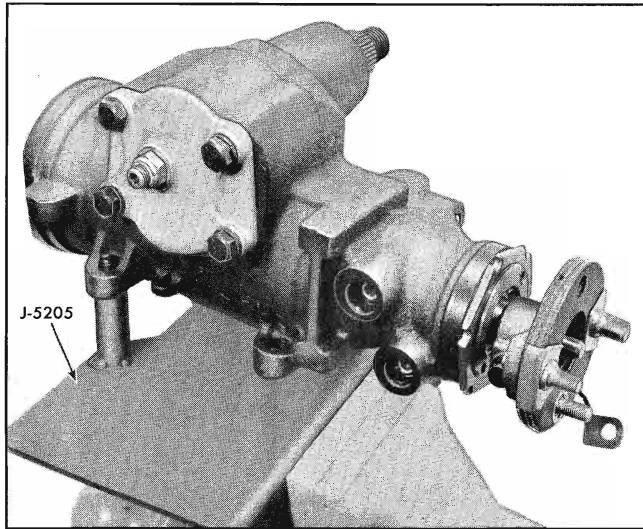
A-6 Steering Gear Mounted on Tool J-5205
